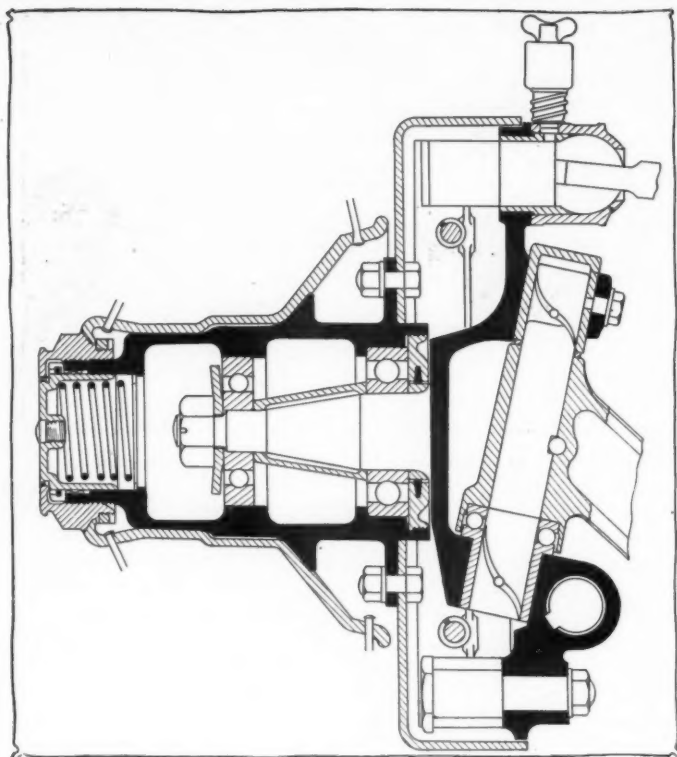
Steering knuckle and front wheel mounting on the Argyle
